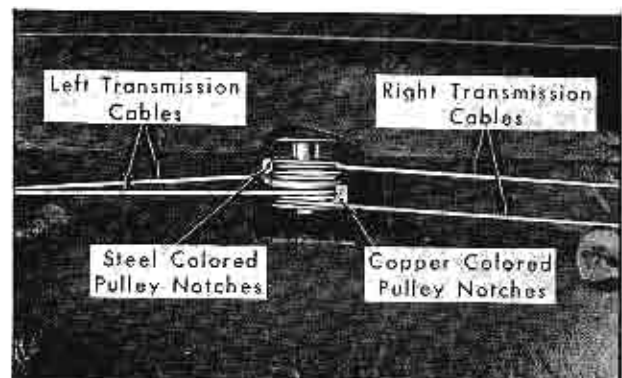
Transmission Cable to Auxiliary Drive Pulley Attachment
